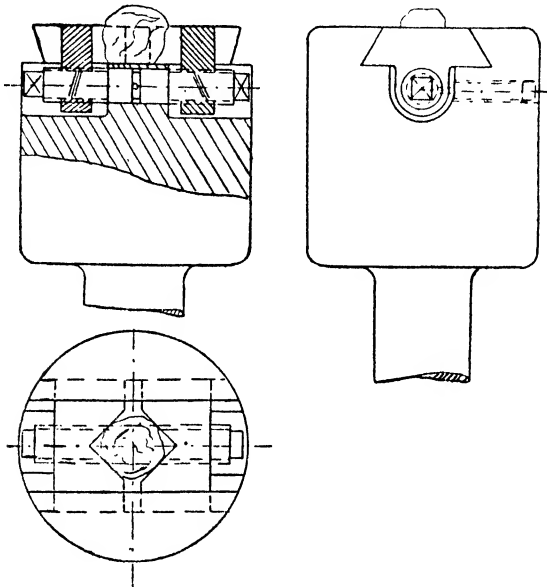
Mechanical dop for holding nearly cylindrical stones such as used for making drawing dies
